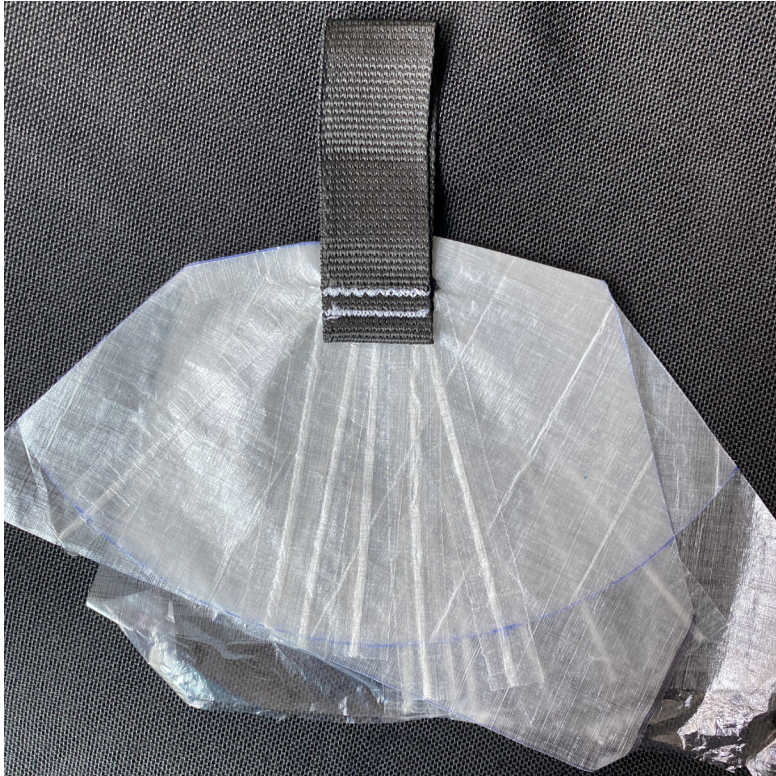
Prototyping the connection between filament paths and anchoring points.
